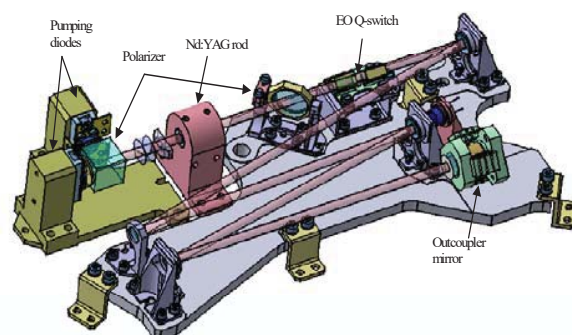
MO optical lay-out and mechanical redundant packaging.
